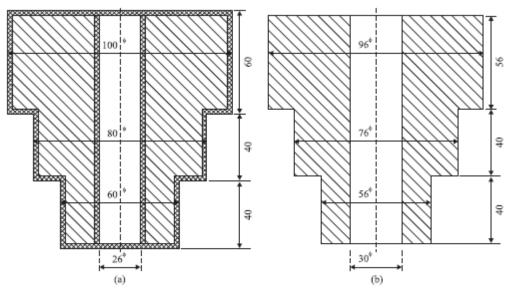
(a) Component as cast, (b) Finished component (All dimensions are in mm).
